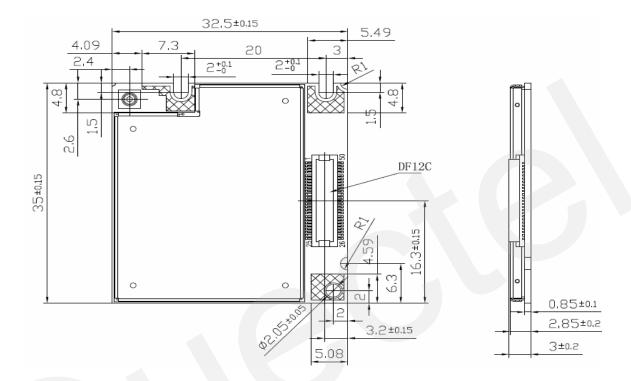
M20 TOP and SIDE dimensions (Unit: mm)
